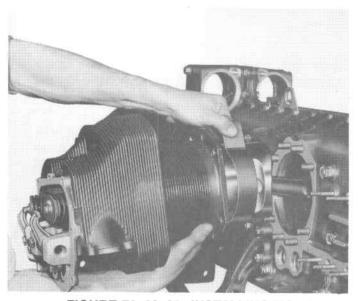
INSTALLING NO. 5 CYLINDER.
